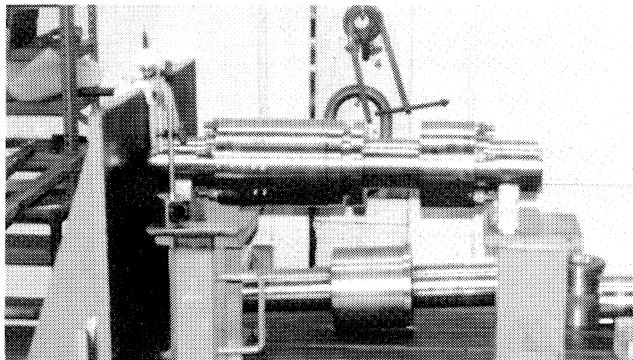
New Expander End Stub Shaft Being Checked for Runouts Between Balance Mandrels.
